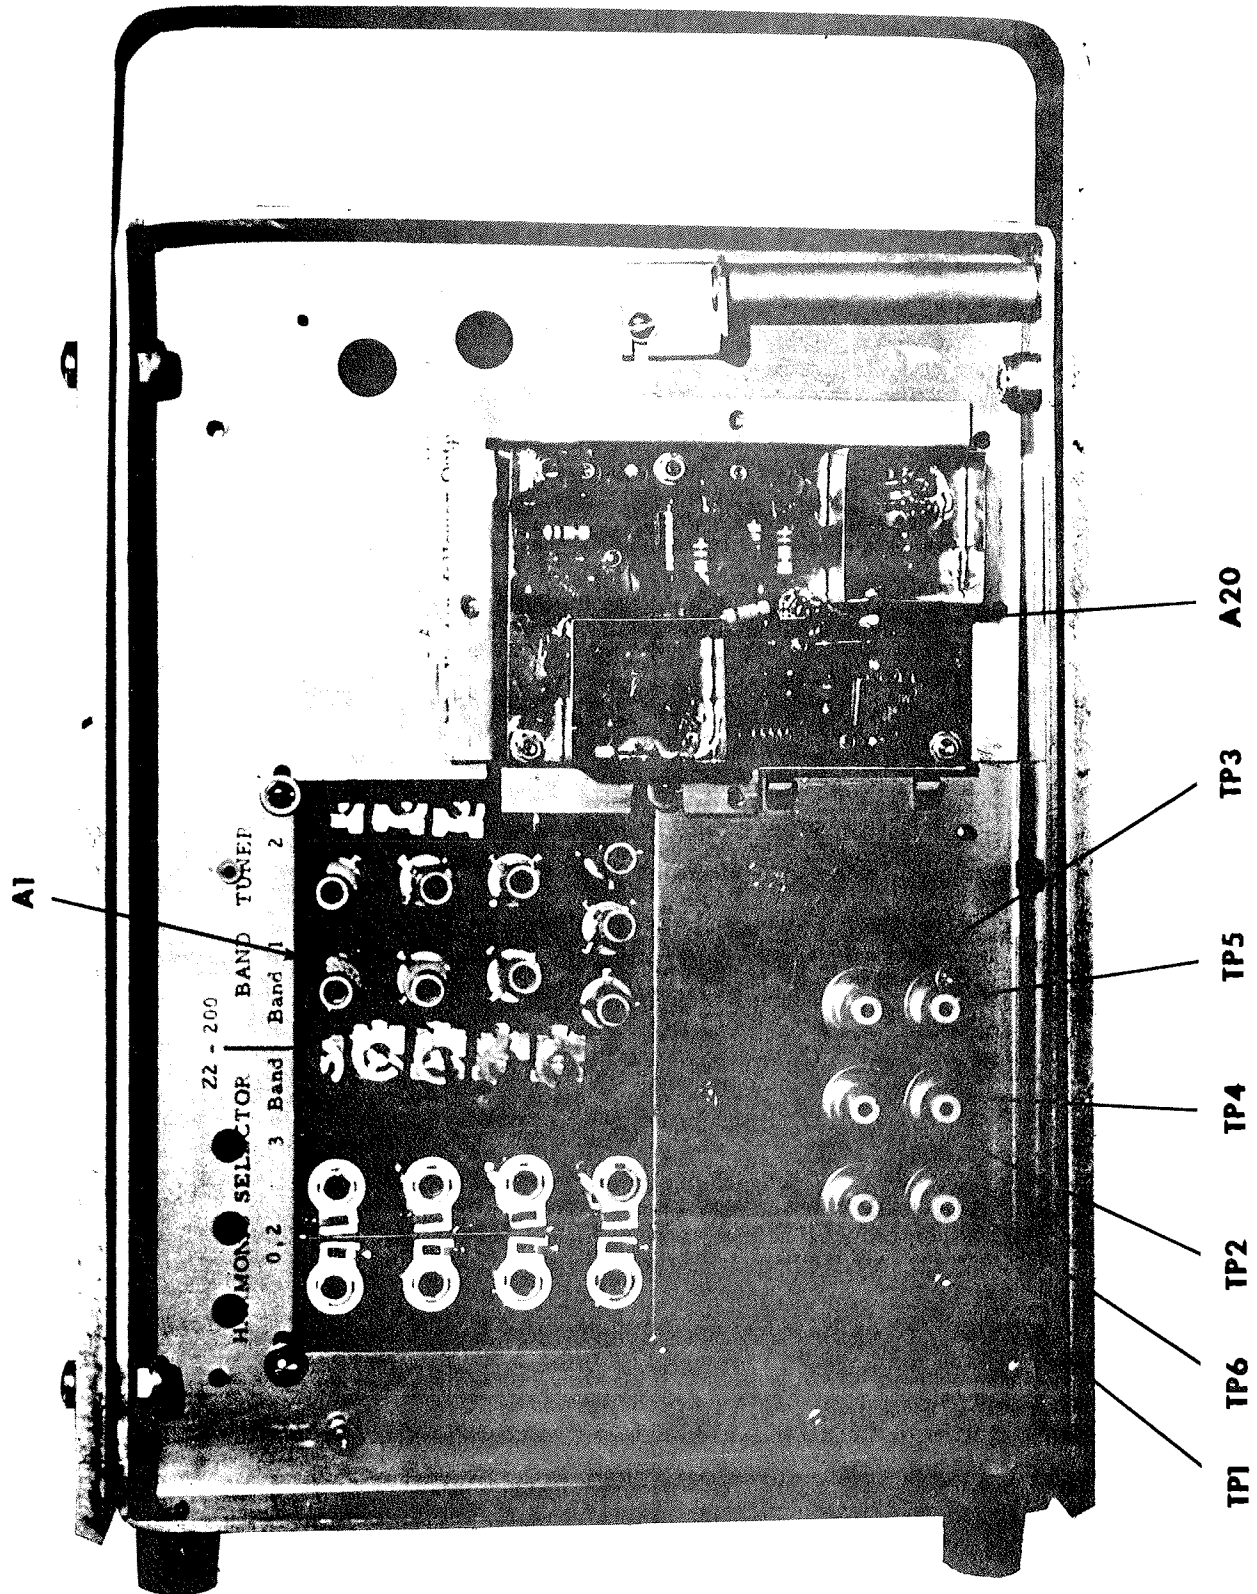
Type 107B Digital Frequency Meter/Signal Generator, Subassembly and Parts Location (Sheet 2 of 5, Left Side View)
